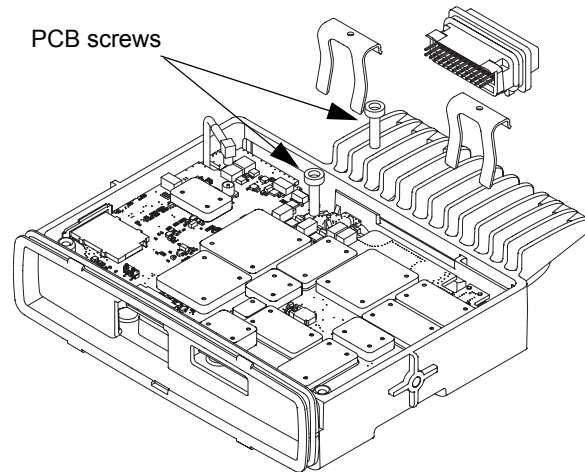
Connector Clips, Accessory Connector and PCB Screws Removal
